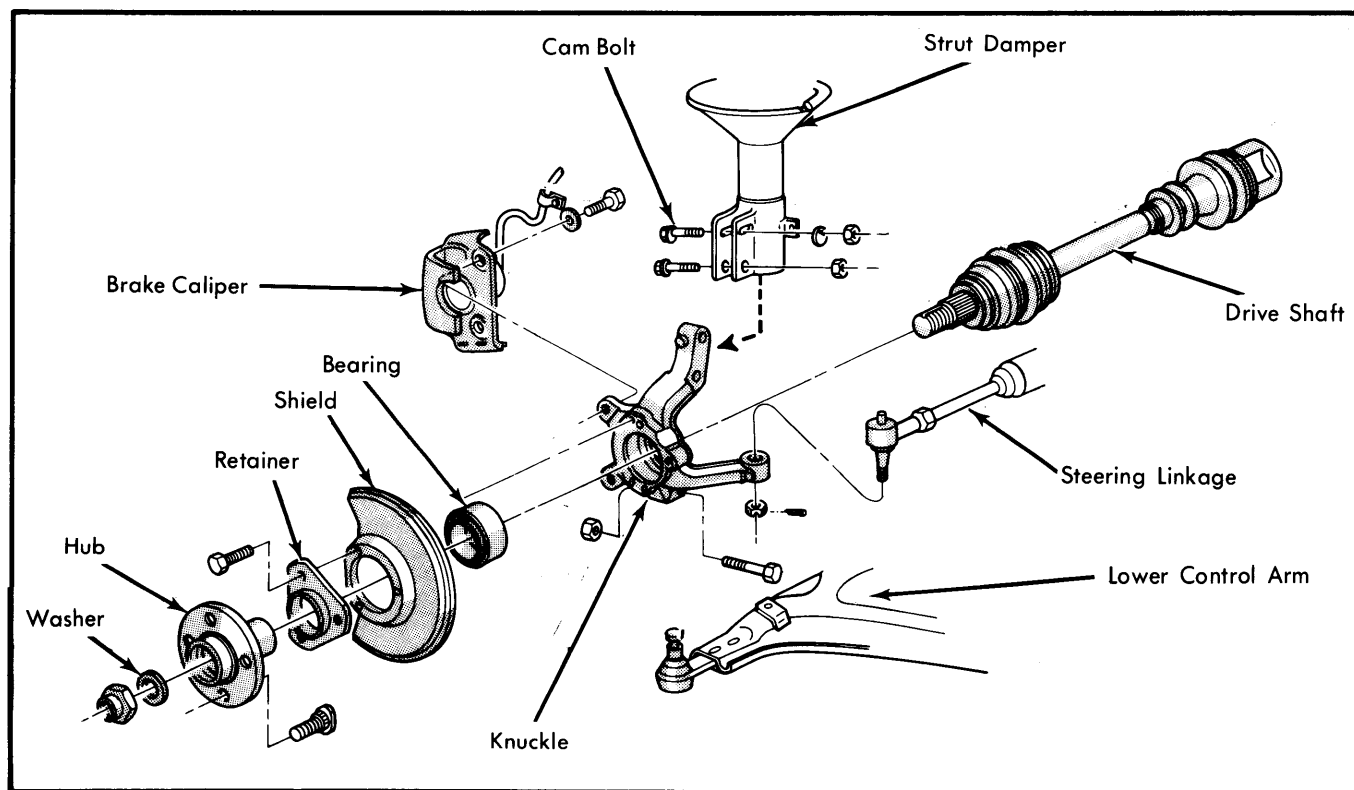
Chrysler Front Wheel Drive Strut Damper Assembly
